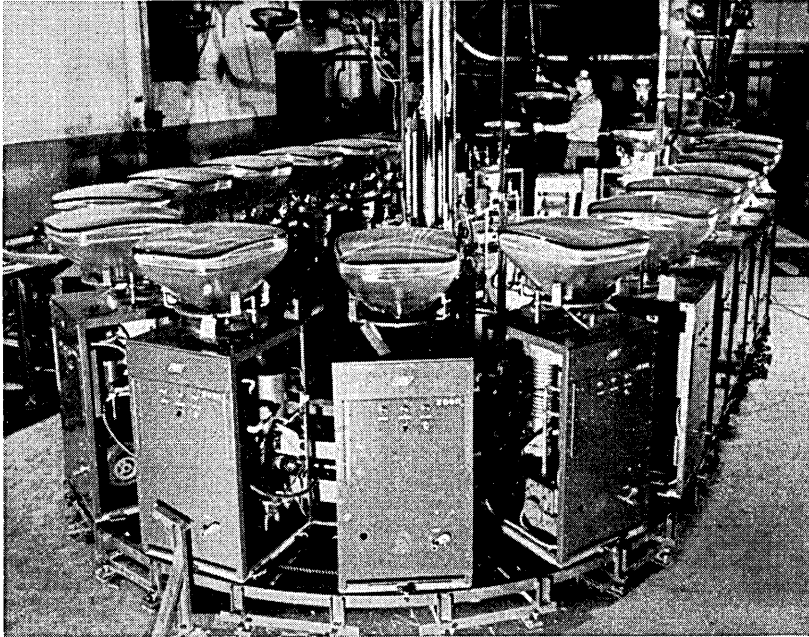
Automatic aluminizing section of Sylvania television-tube line
